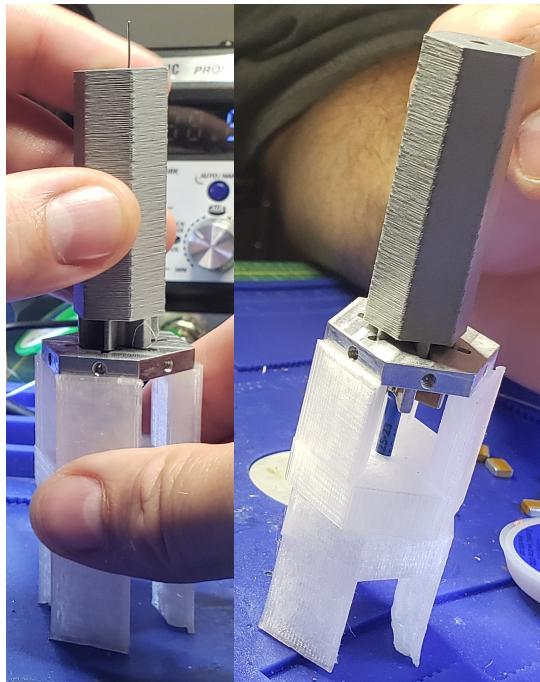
Removing capacitor array from jig using removal tool. Both resistor jigs were used to hold the assembly above the work table.
